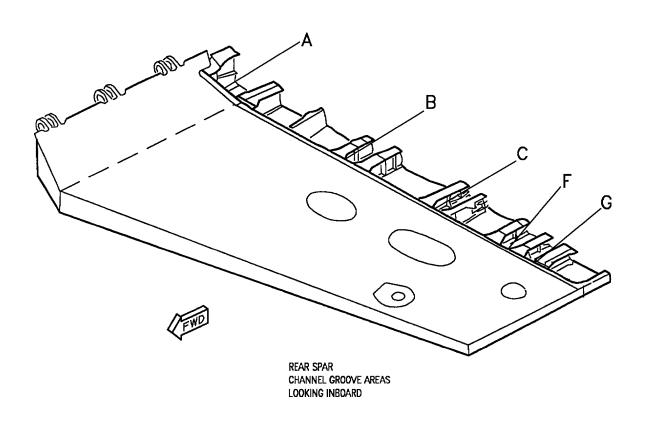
Wing Fold Rib Channel Groove Seal Injection (Sheet 2)
